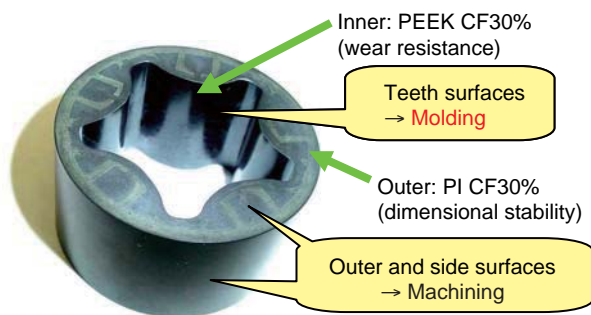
Developed outer rotor manufactured using two-stage injection molding
